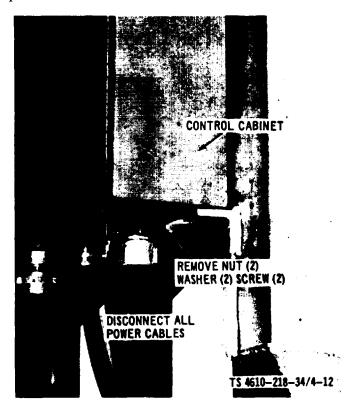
Electrical Control Cabinet, Removal and Installation
